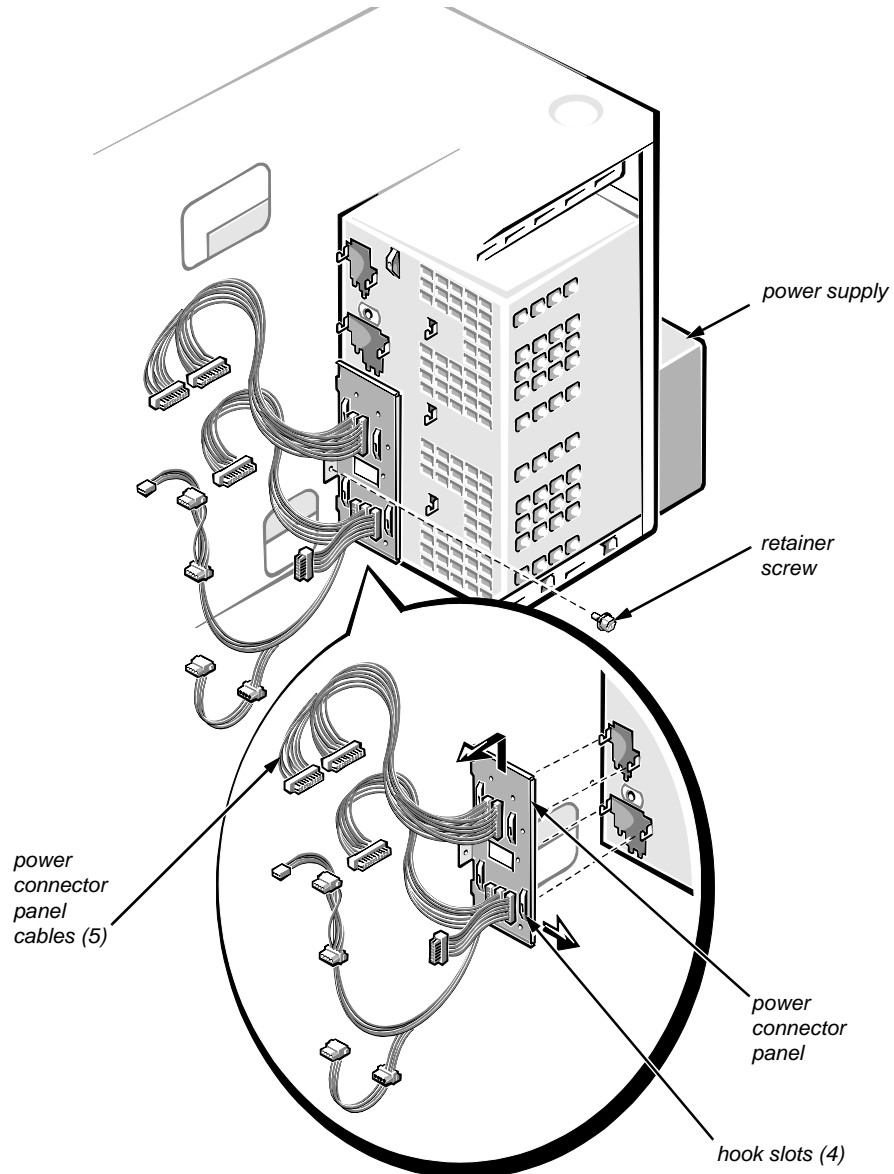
Power-Supply Paralleling Board Removal (Redundant Systems)
